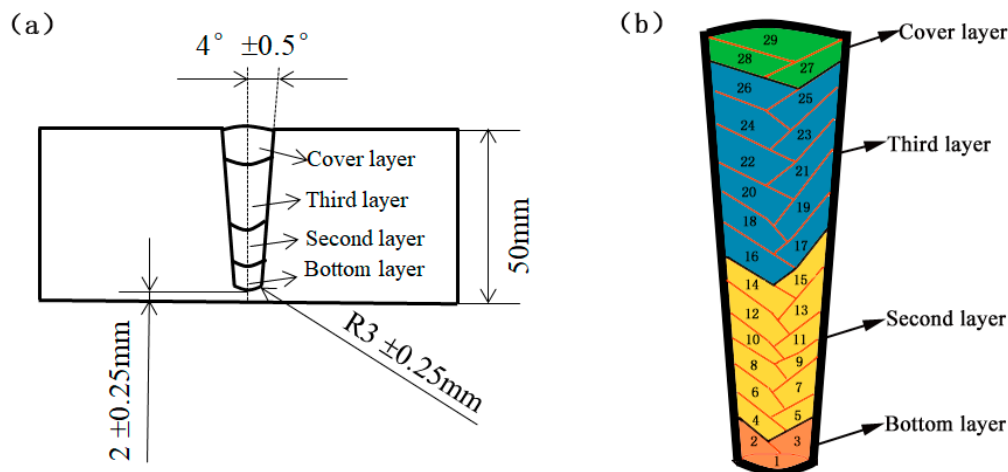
(a) Geometry of the U-groove; (b) all weld beads were divided into four layers: bottom layer, second layer, third layer, and cover layer.
